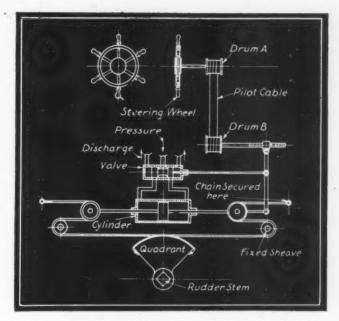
Hydraulic operation proves especially suitable for steering gear mechanism
